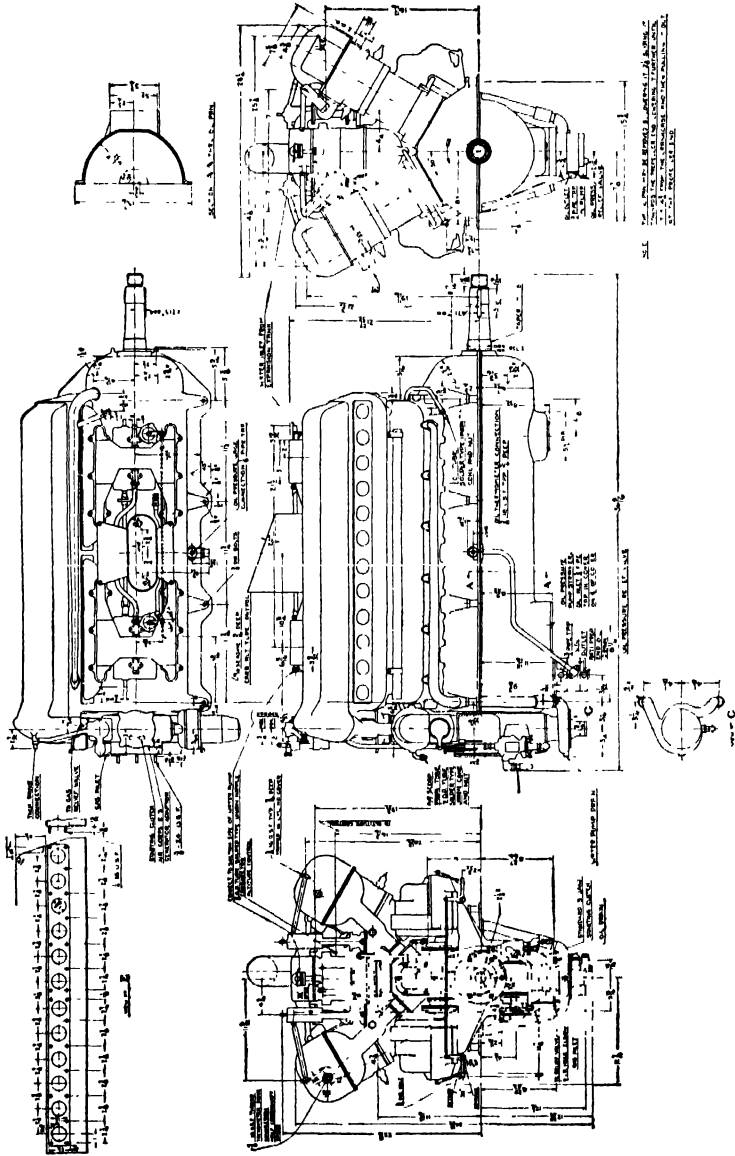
Installation Drawing of Curtiss D12D Aviation Engine.
